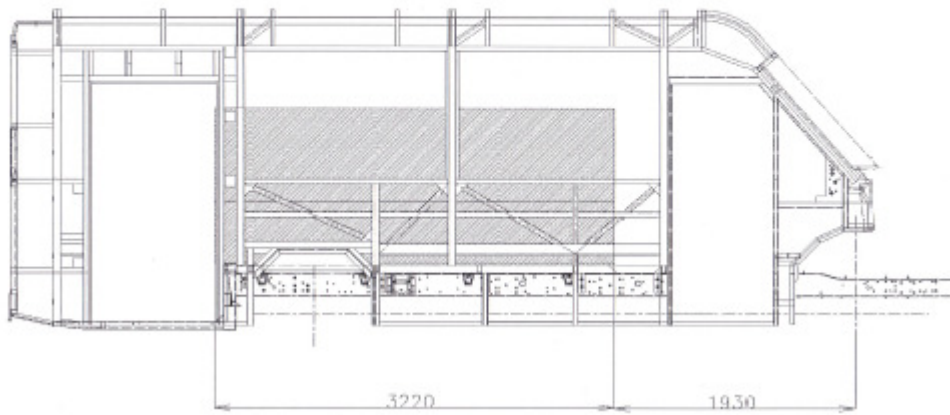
Structure of the left sidewall including door apertures in STRATOS LE37(L37)
